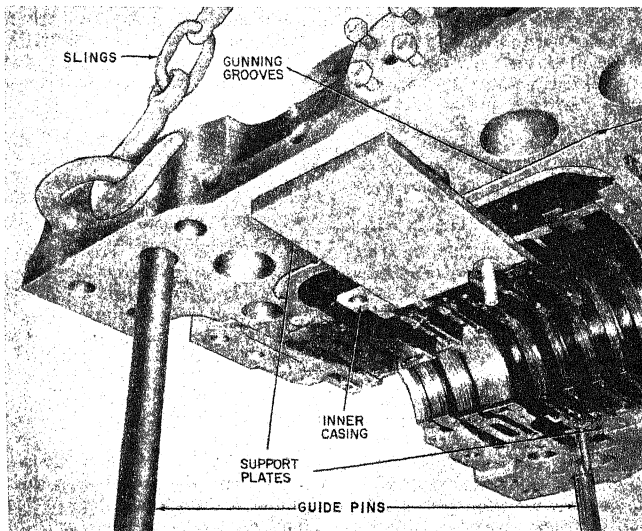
Lifting or lowering upper casing of a high-pressure turbine.
